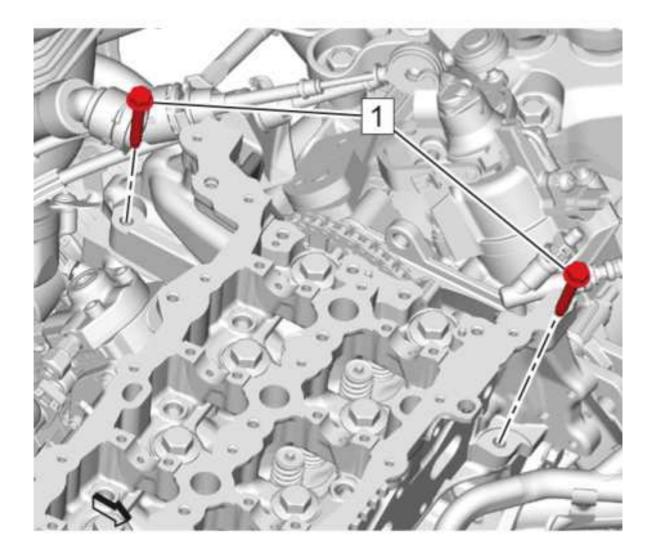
Outer Cylinder Head Bolts Courtesy of GENERAL MOTORS COMPANY
